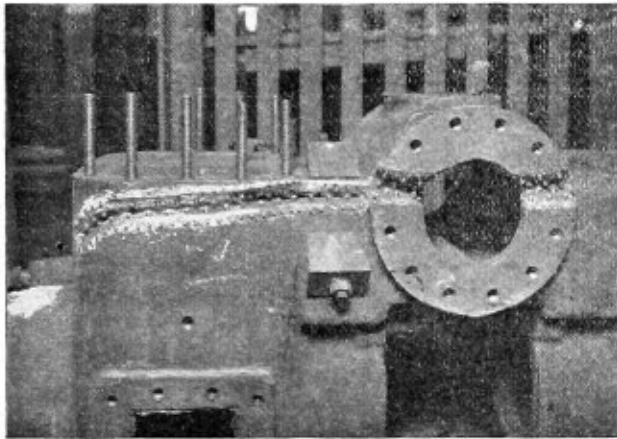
Broken Feed-Water Pump Prepared for Electric Arc Welding
